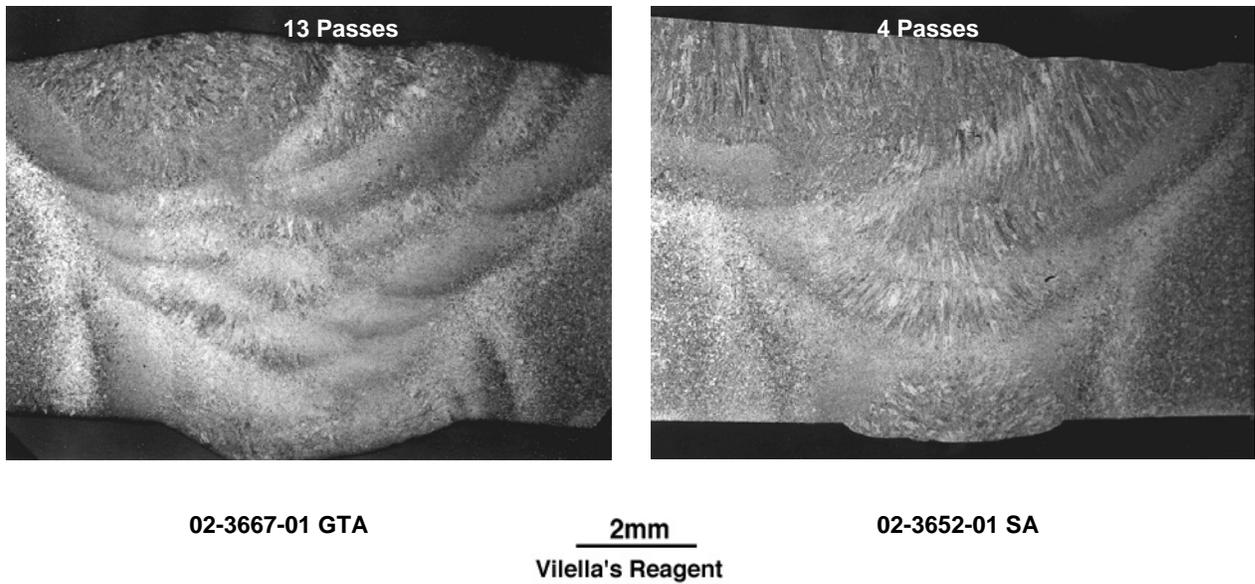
Macrostructure of gas-tungsten-arc (GTA; left) and submerged-arc (SA; right) welds. Note that the SA weld used only one-third the number of passes of the GTA weld.
